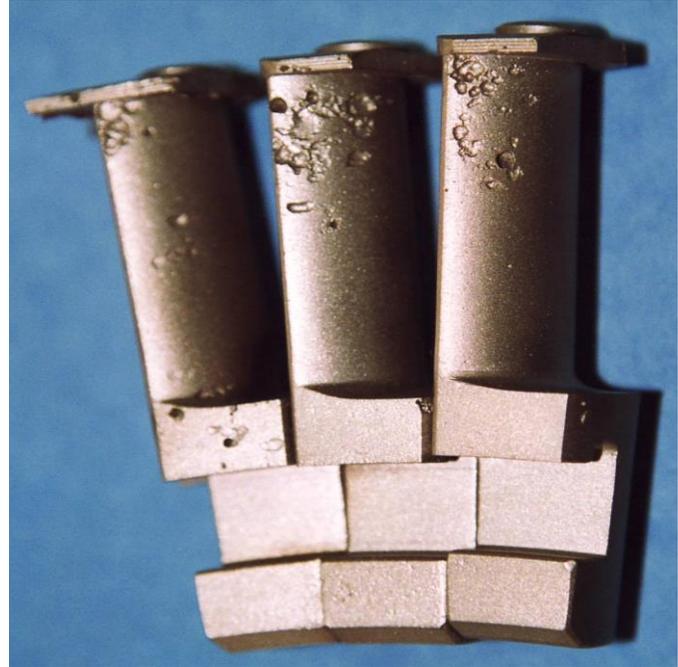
Severe Steam Turbine Rotor Blade Pitting
